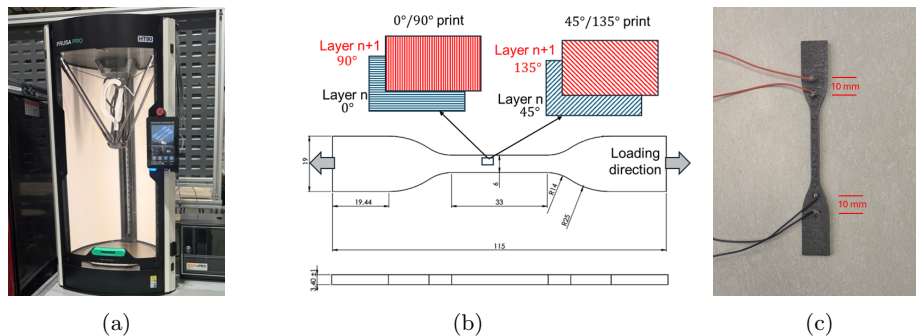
(a) Prusa Pro HT90 used for printing specimens, (b) printed specimen dimensions showing print orientations with loading direction, and (c) prepared specimen with soldered electrodes.
